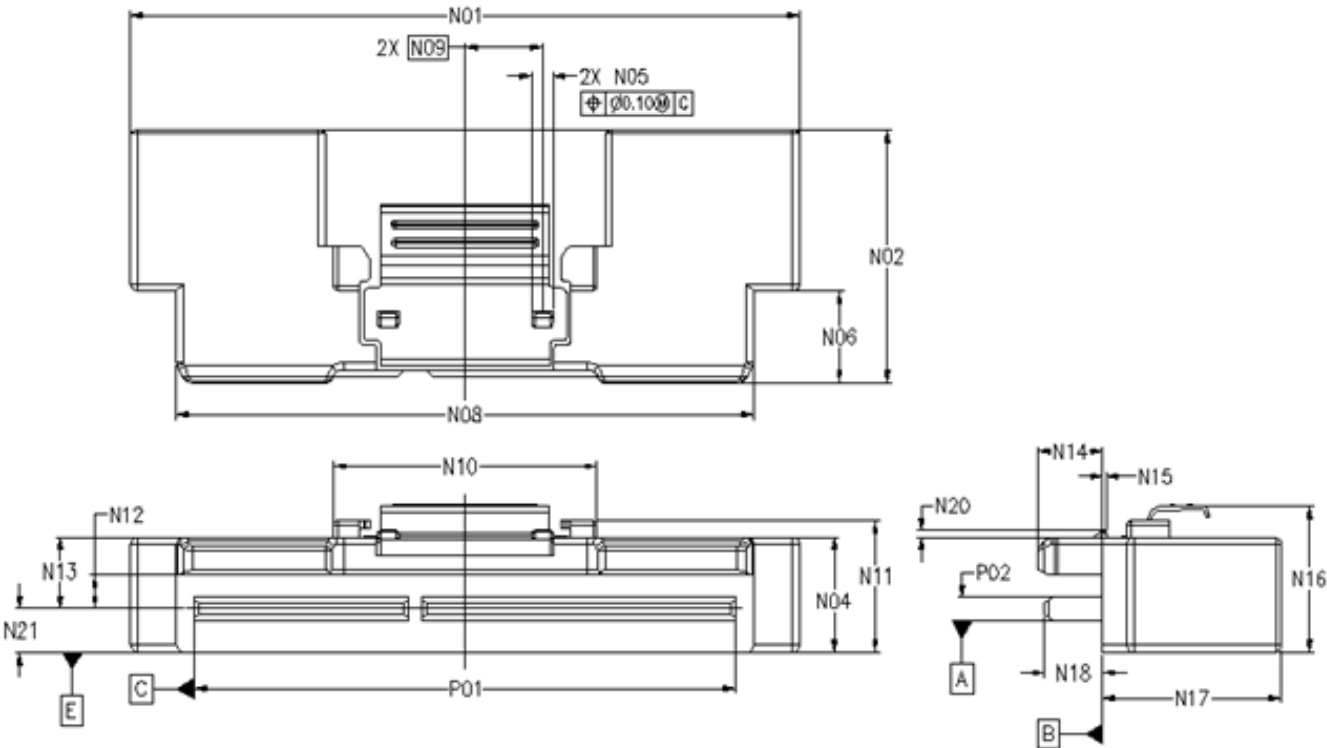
Straight Plug with No Side Flanges for 124 Contacts
